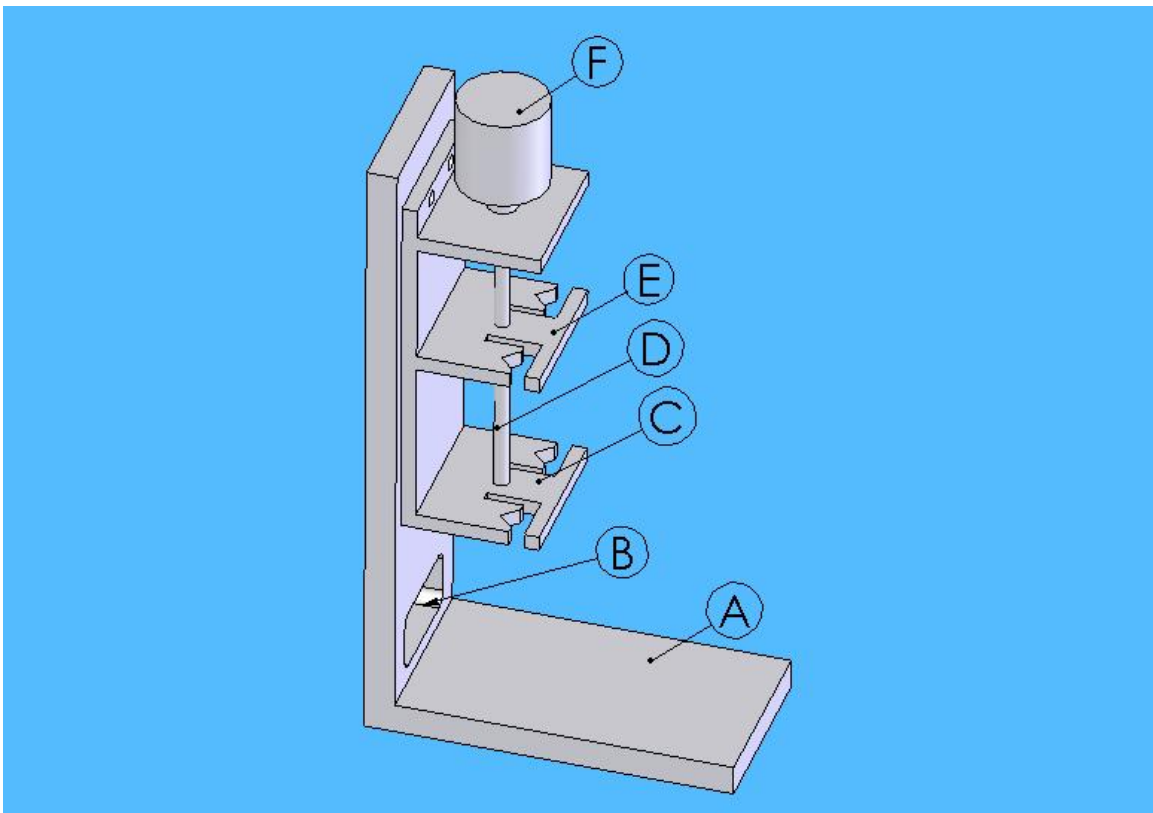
Detail of syringe scaffolding with motor. (A) base. (B) pass-through for air flow. (C) syringe holder. (D) threaded shaft. (E) moving plunger depressor. (F) gear-head motor.
